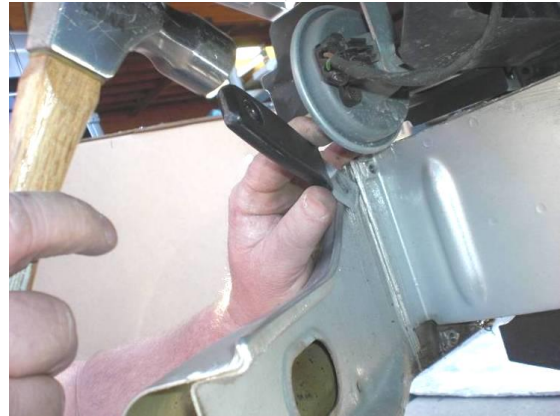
Releasing Stock Bumper with Hammer and Putty Knife
